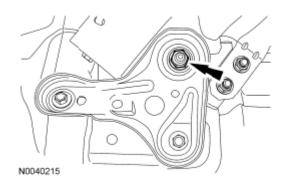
Locating Subframe Bracket And Bolt Courtesy of FORD MOTOR CO.
